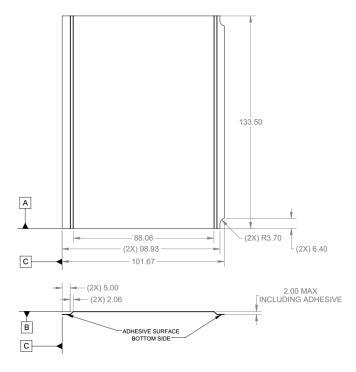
Large Card Bottom Side Insulator (Top and Side View)
